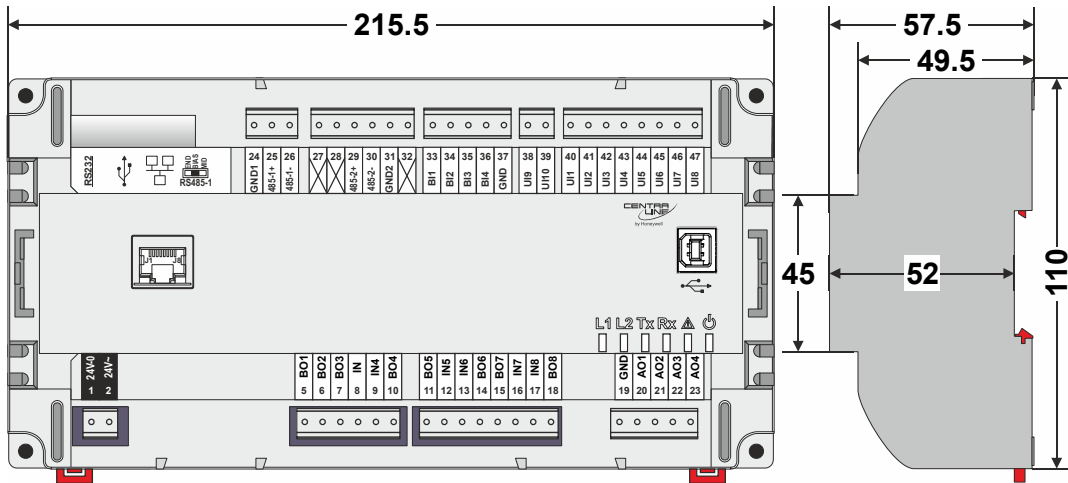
EAGLE Controller with RJ45 socket for connection of CLEAHMI21 External HMI, dimensions (in mm)
